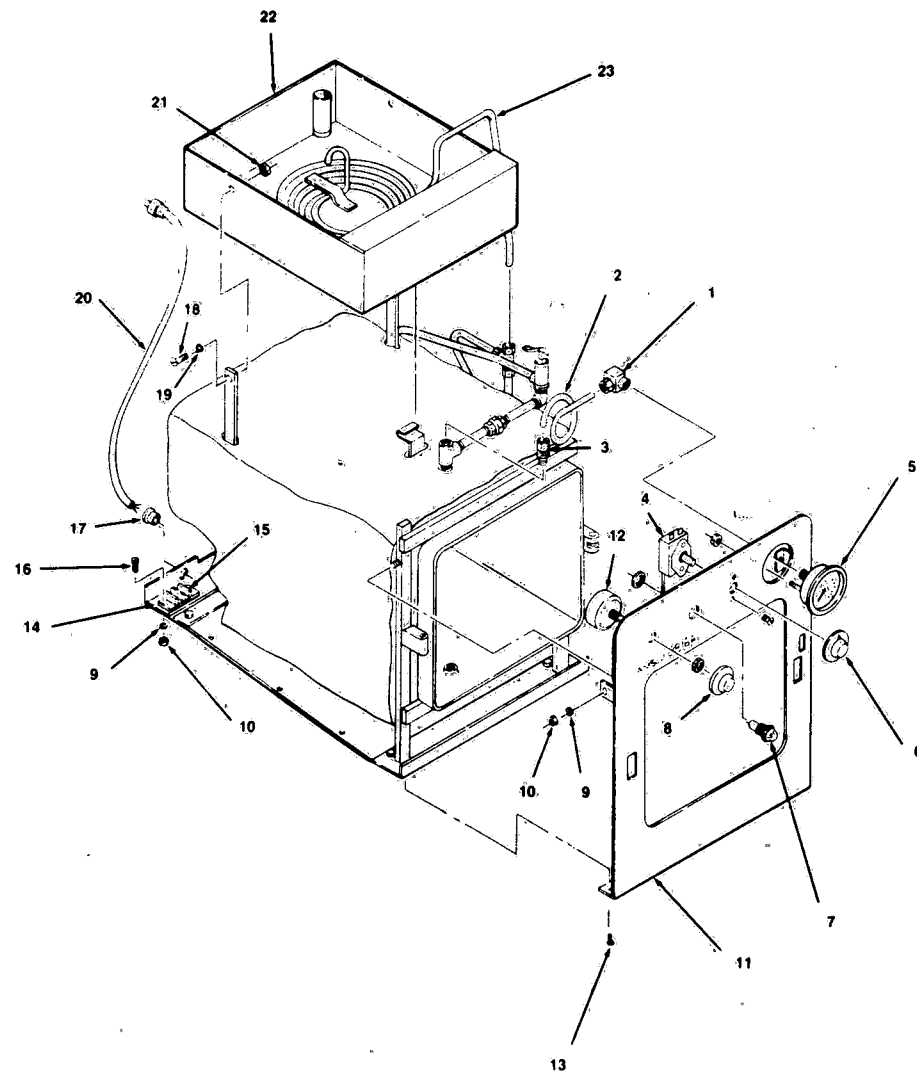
GENERAL ASSEMBLY — PART 2 OF 4.
